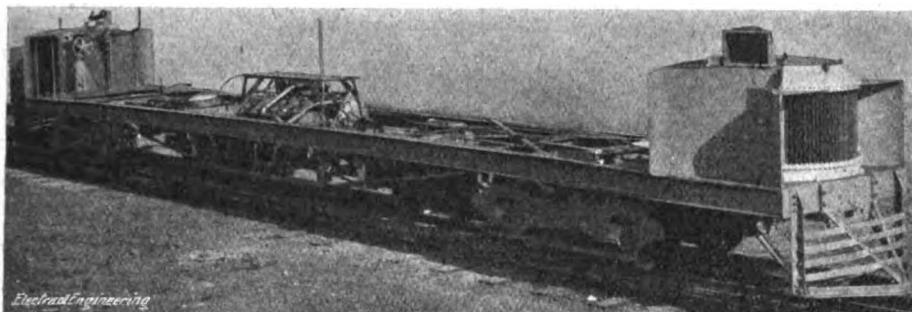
COMPLETE CHASSIS OF 200 H.P. RAIL COACH.
